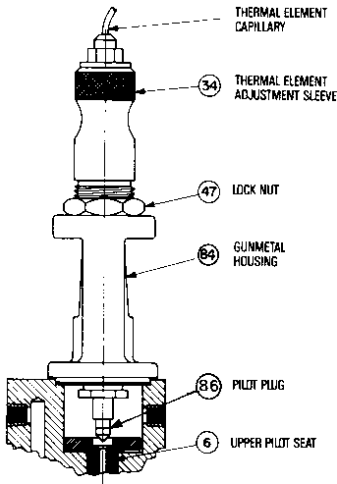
SUPERSTRUCTURE ASSEMBLY ①
